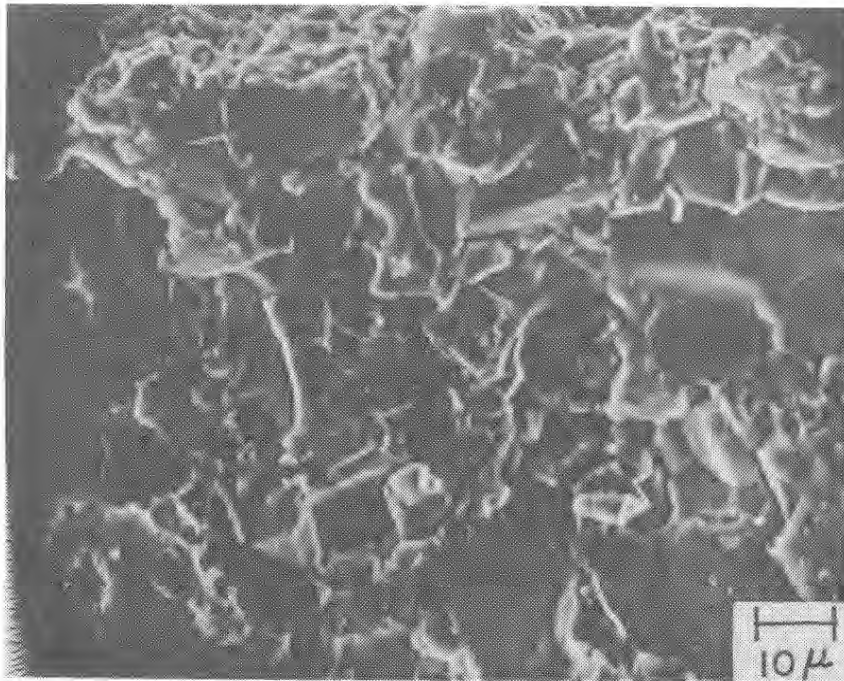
Fracture surface through the 70 $\mu\text{in. } R_a$ cut edge of sample 2a in TiB_2 showing the roughness of the cut surface and recast layer size.
